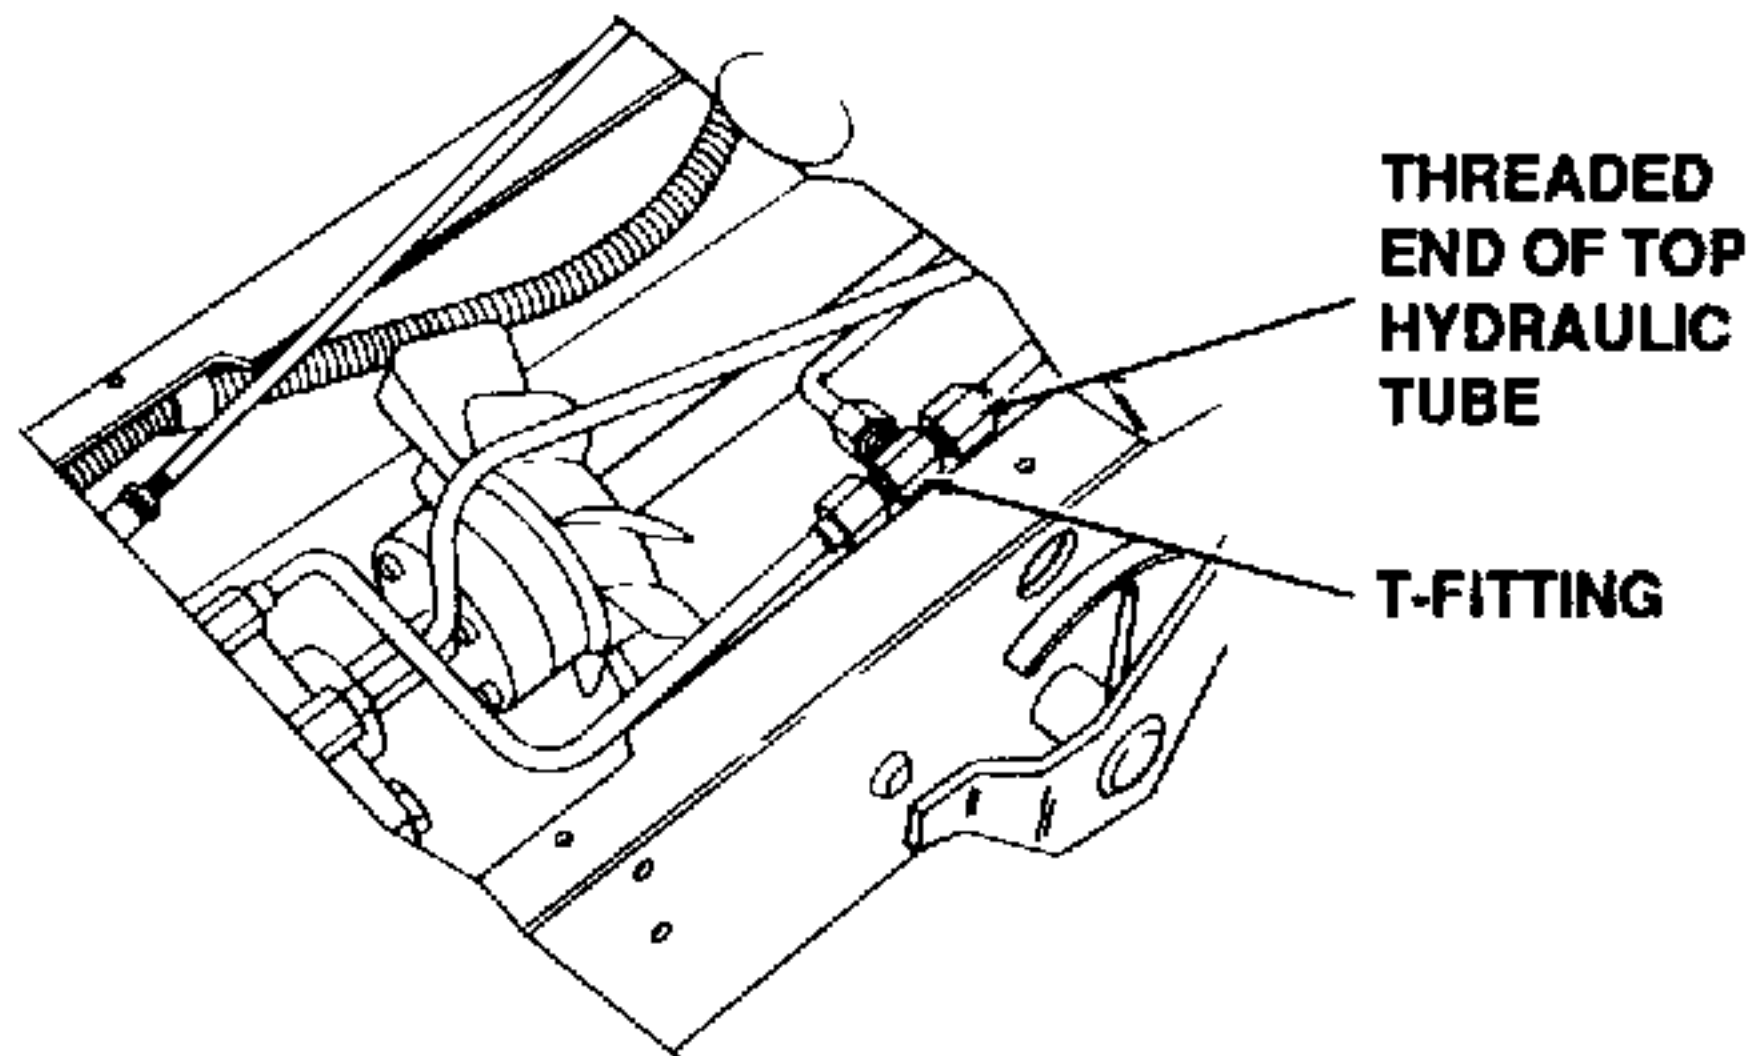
Removing Threaded End of Top Hydraulic Tube.
